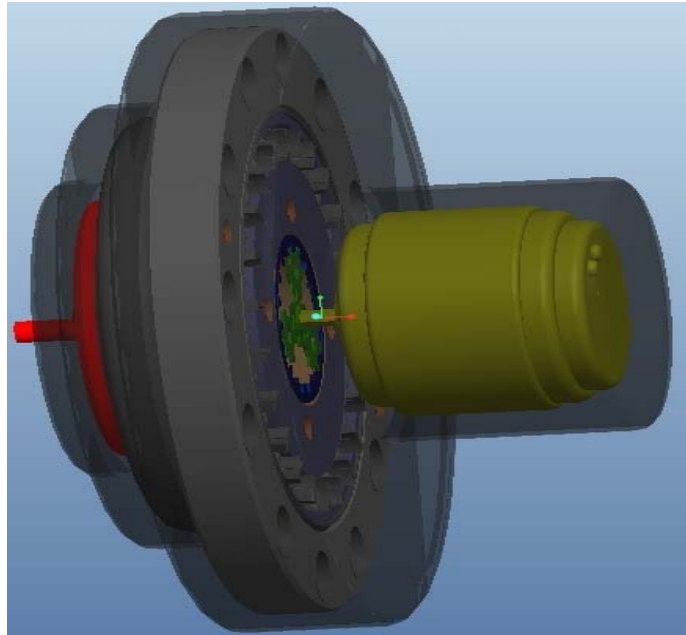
Motor, Planetary gear set, harmonic drive and housing
